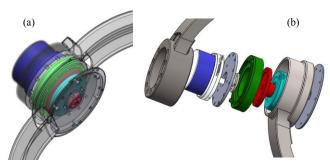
Inter-joint structure: (a) collapsed view, (b) exploded view, motor (blue), HD (green), flange/torsional spting (red), encoder (cyan)
